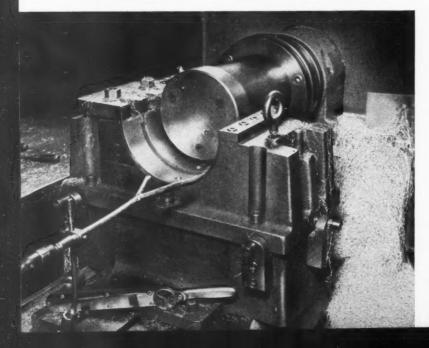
Bearings are assembled in this fixture for precision boring. During the operation, air blasts remove chips to prevent marring finished surface.
